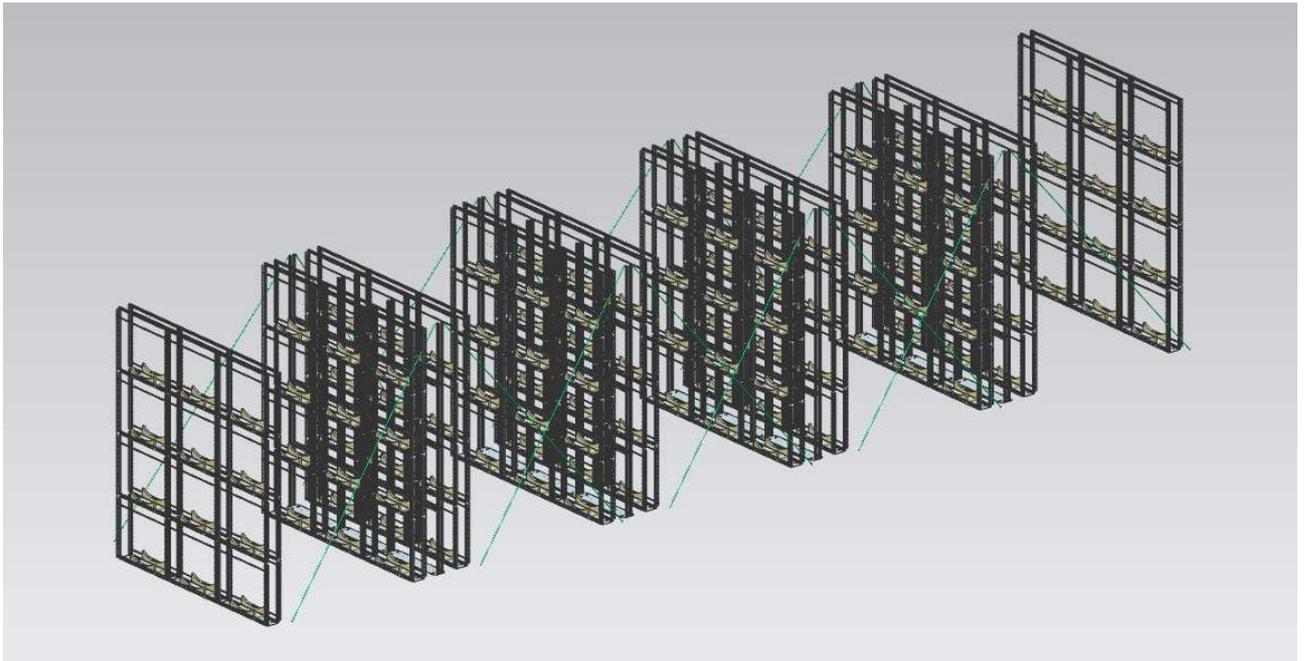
Blade's Seafastening of the Decom Tools Vessel
